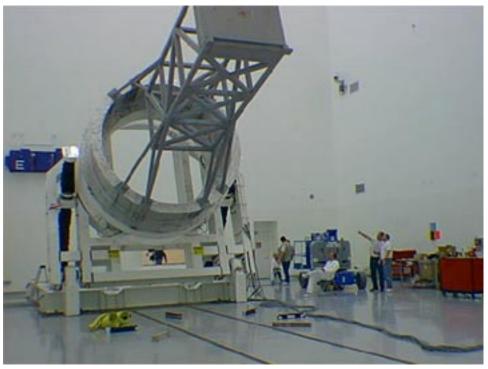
SBA Rotating to Horizontal With Pathfinder Structure
